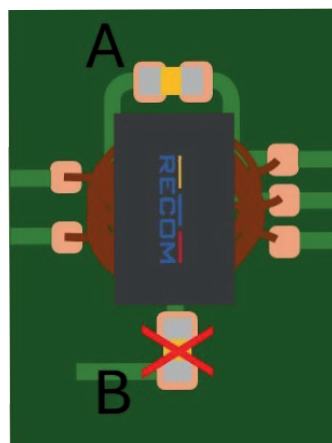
Pads on a small component must be parallel (A) to the heavy component, not perpendicular (B)
